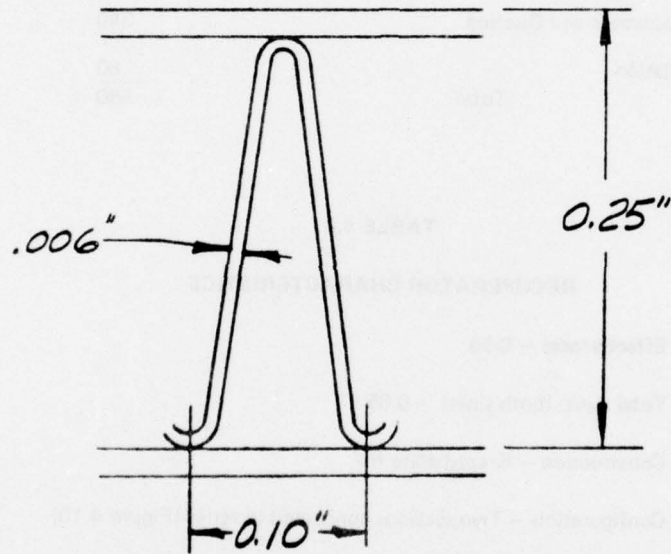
RECUPERATOR HEAT TRANSFER SURFACE
